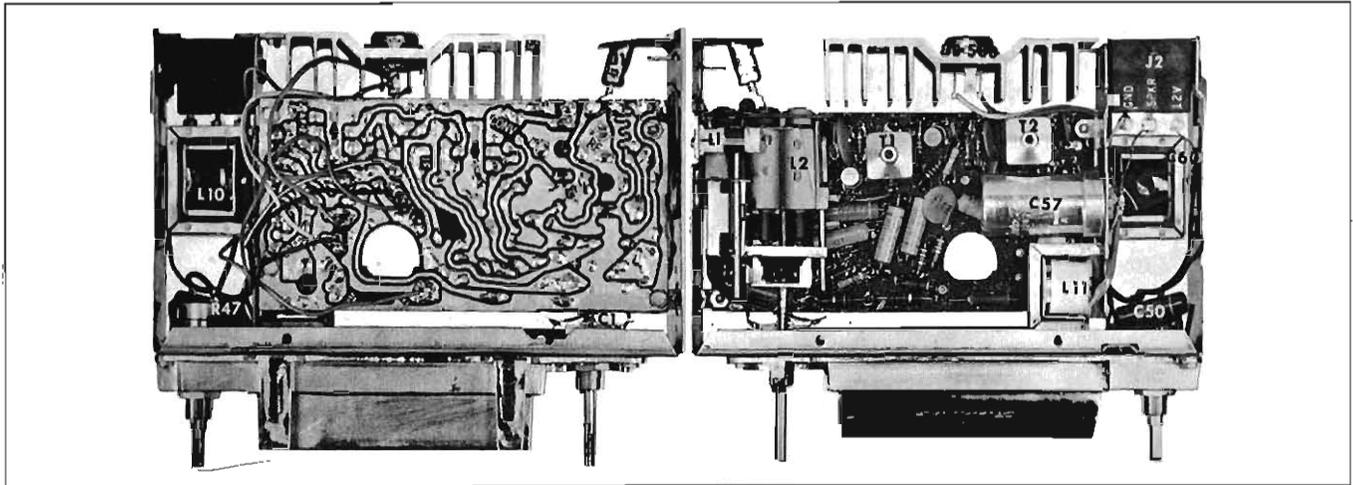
CORVAIR - PARTS LAYOUT - CIRCUIT BOARD VIEW - 986201 - RADIO
